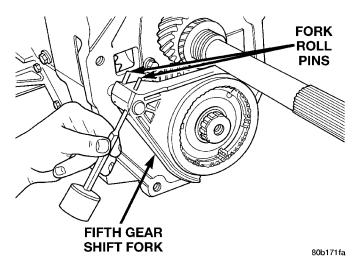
Fifth Gear Shift Fork Roll Pins
